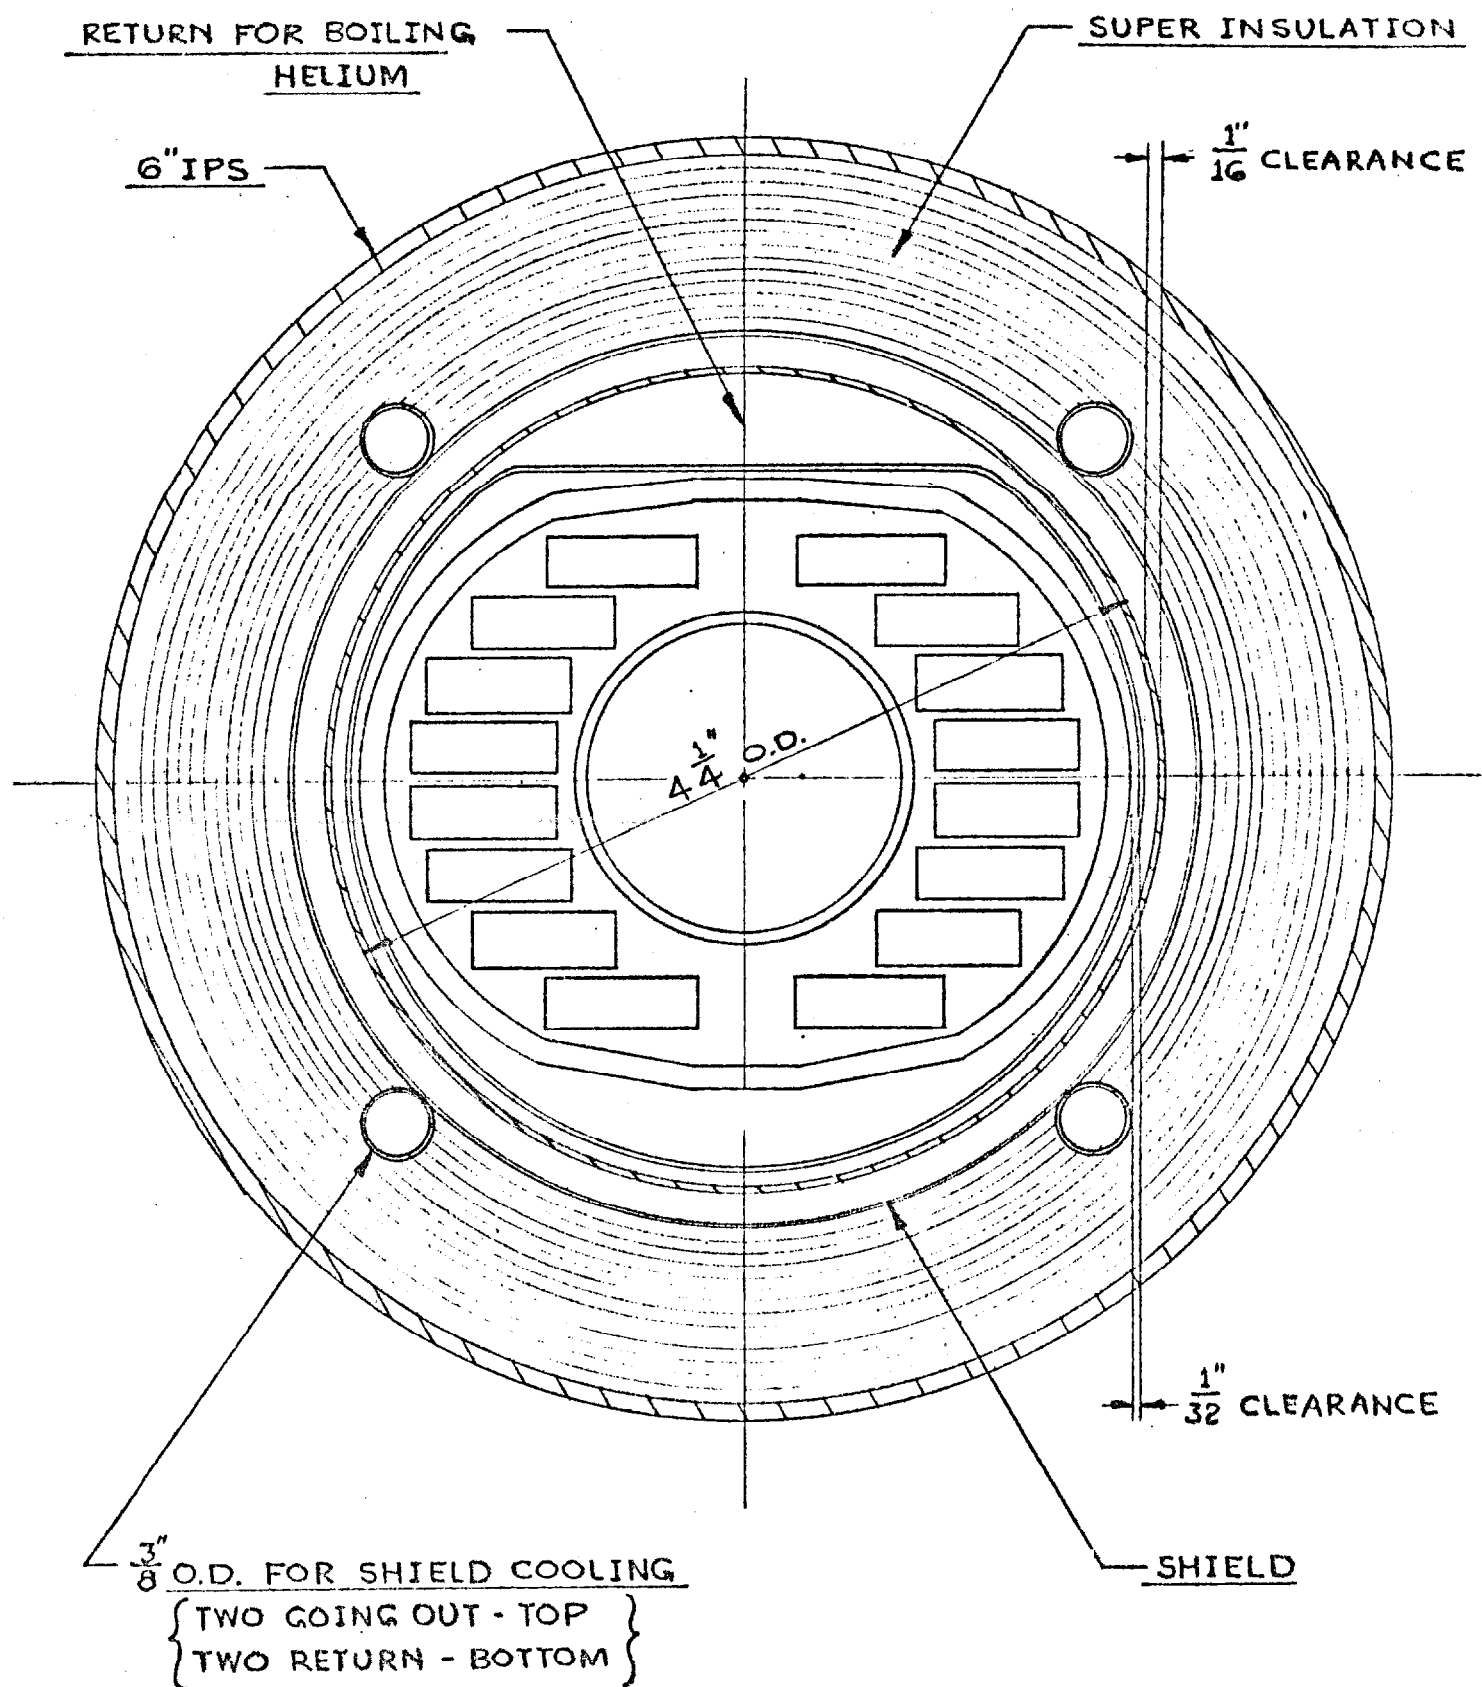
MAGNET ASSEMBLY CROSS-SECTION
